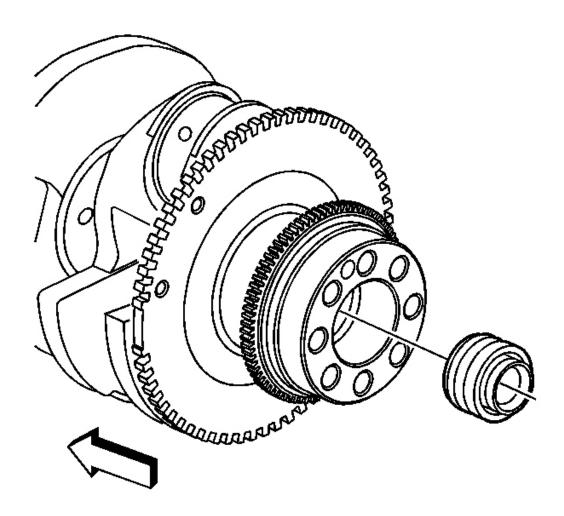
View Of Flywheel Locator Courtesy of GENERAL MOTORS CORP.
